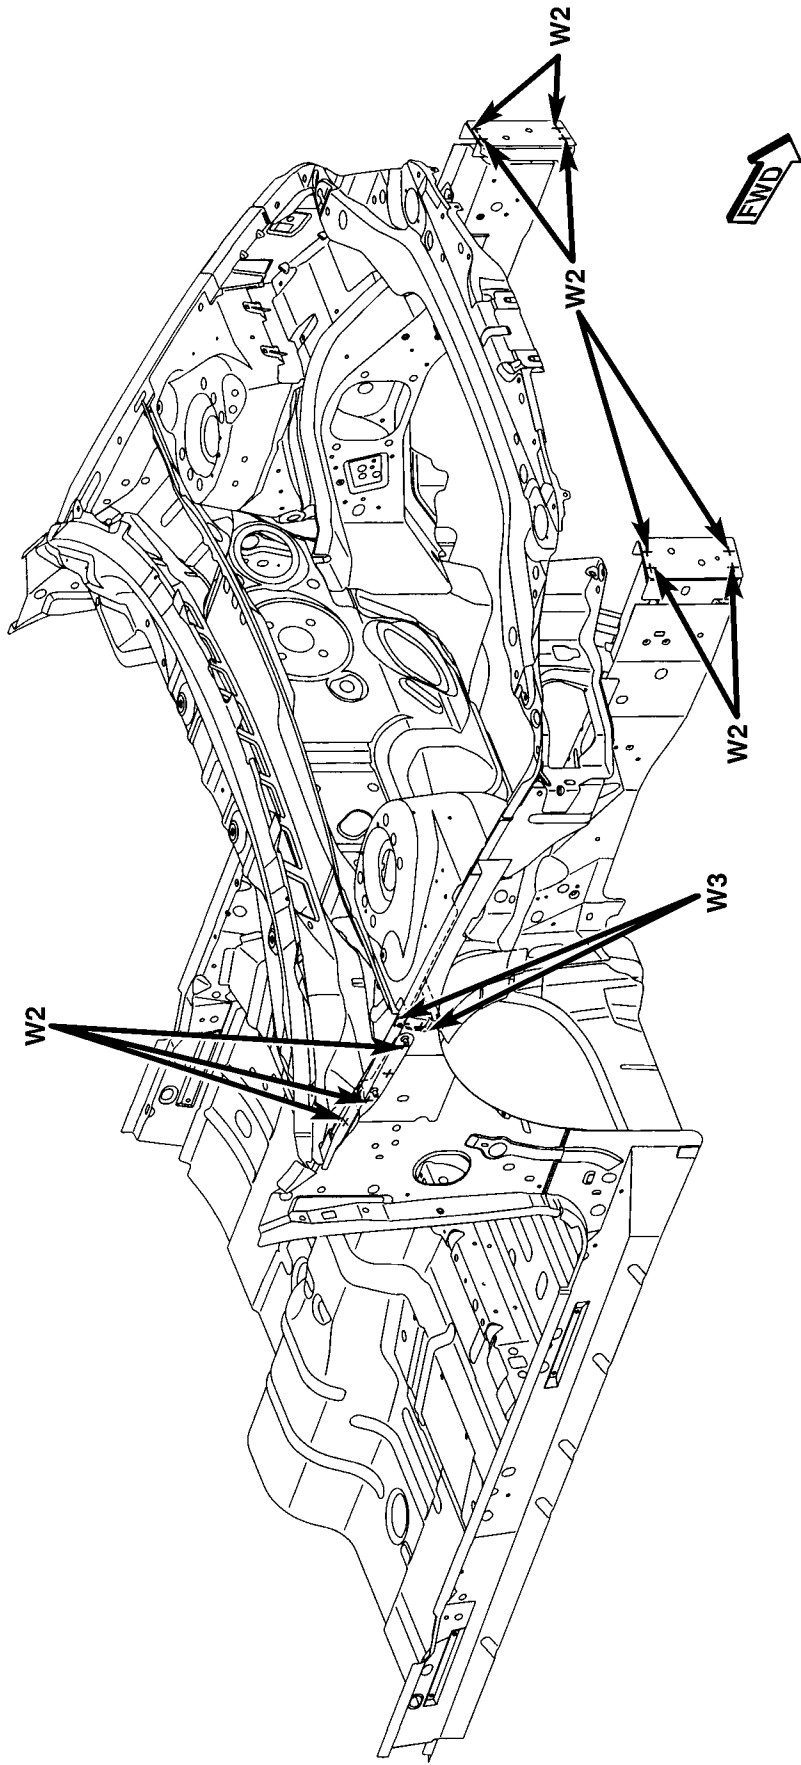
LOWER COWL PLENUM TO INNER LOAD BEAM BUMPER ATTACHING REINFORCEMENT
